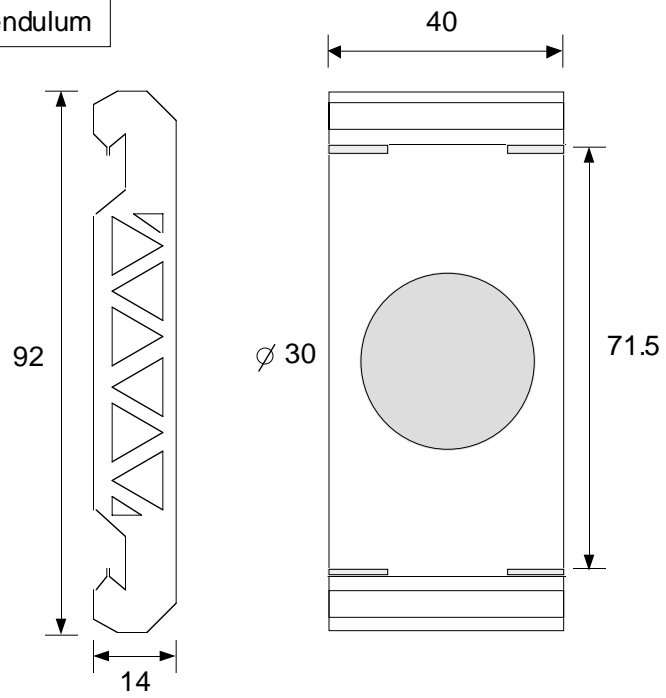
Mechanical drawing of the FP based accelerometer prototype
